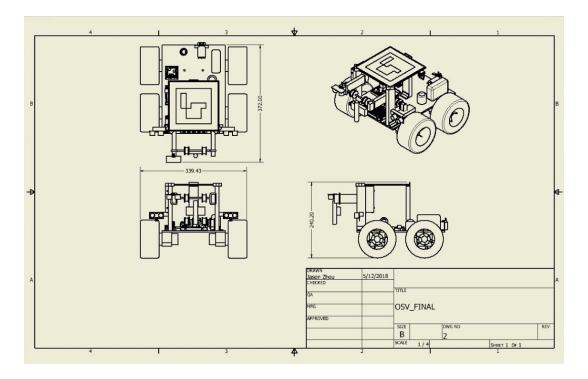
Technical Engineering Drawing #2, including side, top, and front views
